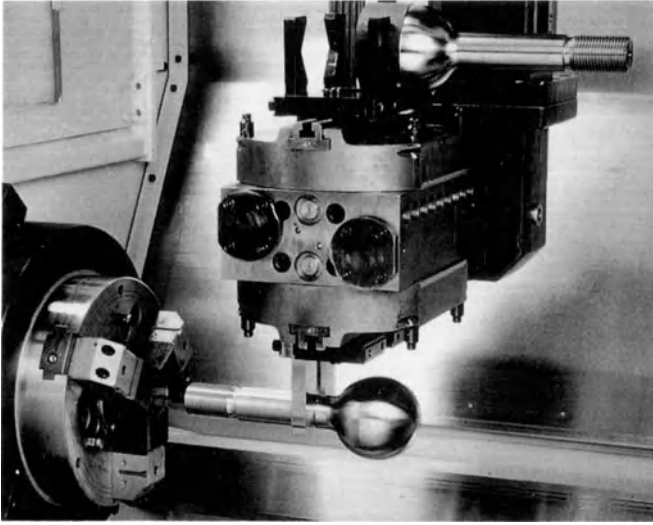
Using a gantry robot to simultaneously load and unload workpieces to a turning centre. [Courtesy of Gildemeister (UK) Ltd.]
